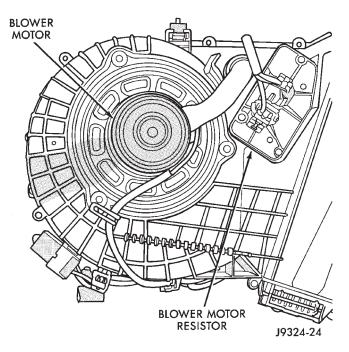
Blower Motor Resistor or Power Module Remove/Install
